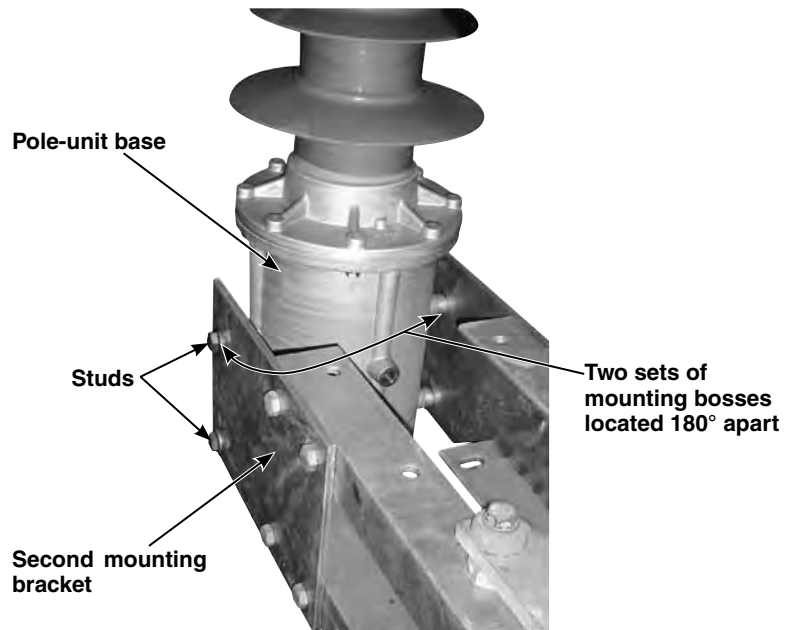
Attach a second pole-unit mounting bracket to pole-unit base.
